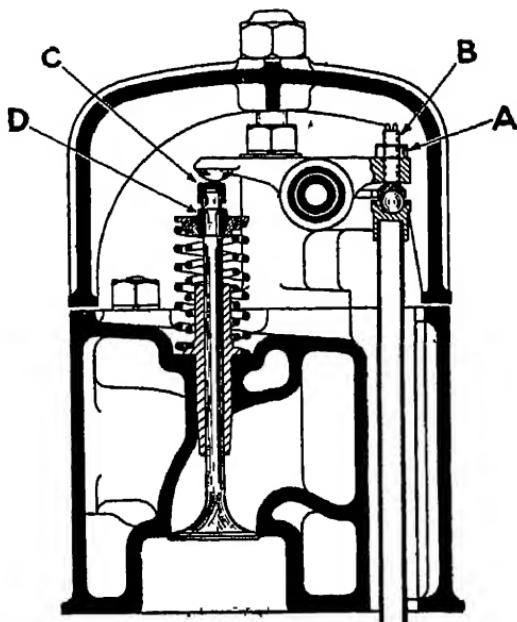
STAR OVERHEAD VALVE GEAR WITH PUSH RODS
